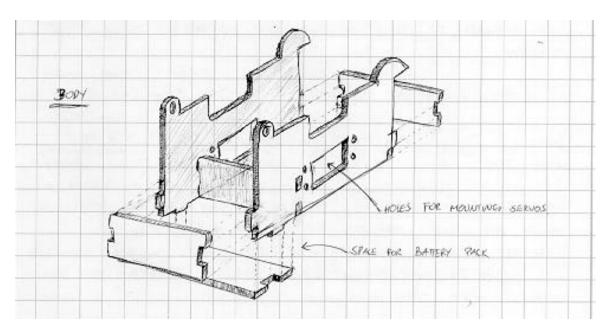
Sketch of TJ frame assembly showing how the four planks join the sides. (Drawing courtesy of Ivan Zapata).
